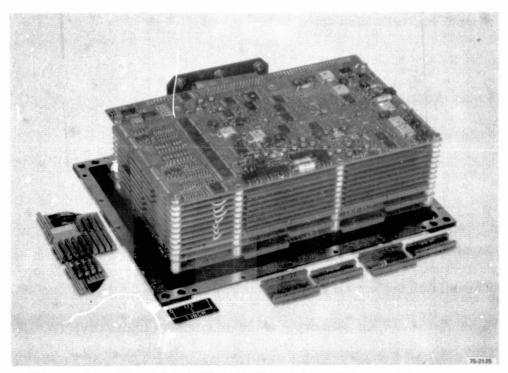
$4K \times 18$ Bit Plated Wire Integral Assembly
